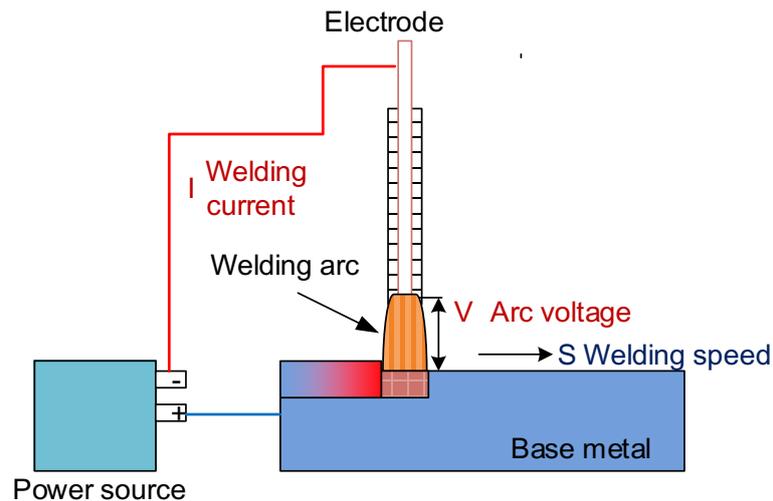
Schematic diagram showing a typical setup of arc welding process for fusion welding.
